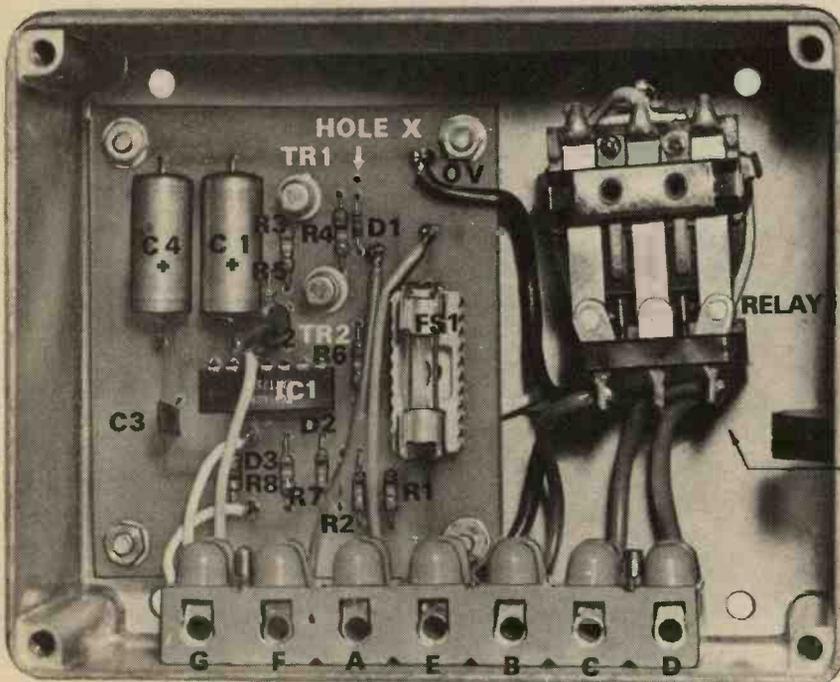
Component layout of Burglar Alarm board. The spare pad (marked X) is for the "positive earth" modification
